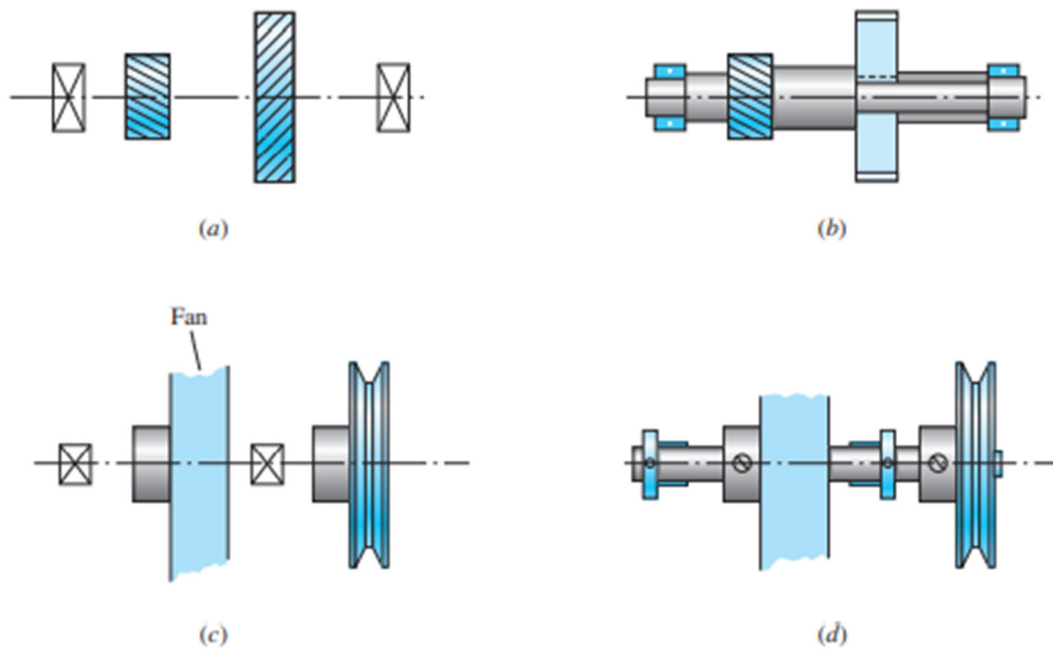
Shafts layouts and shaft-mounted devices.[1]
